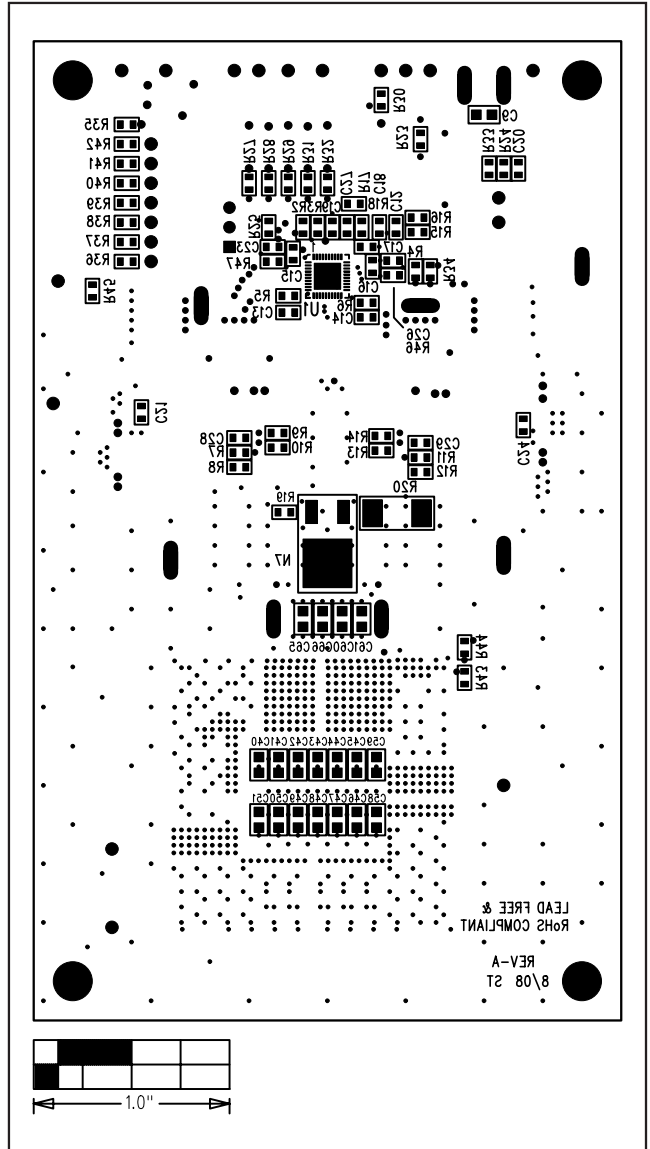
MAX17082 EV Kit Component Placement Guide—Solder Side
